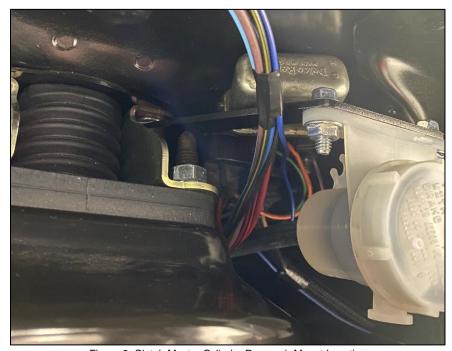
Clutch Master Cylinder Reservoir Mount Location
